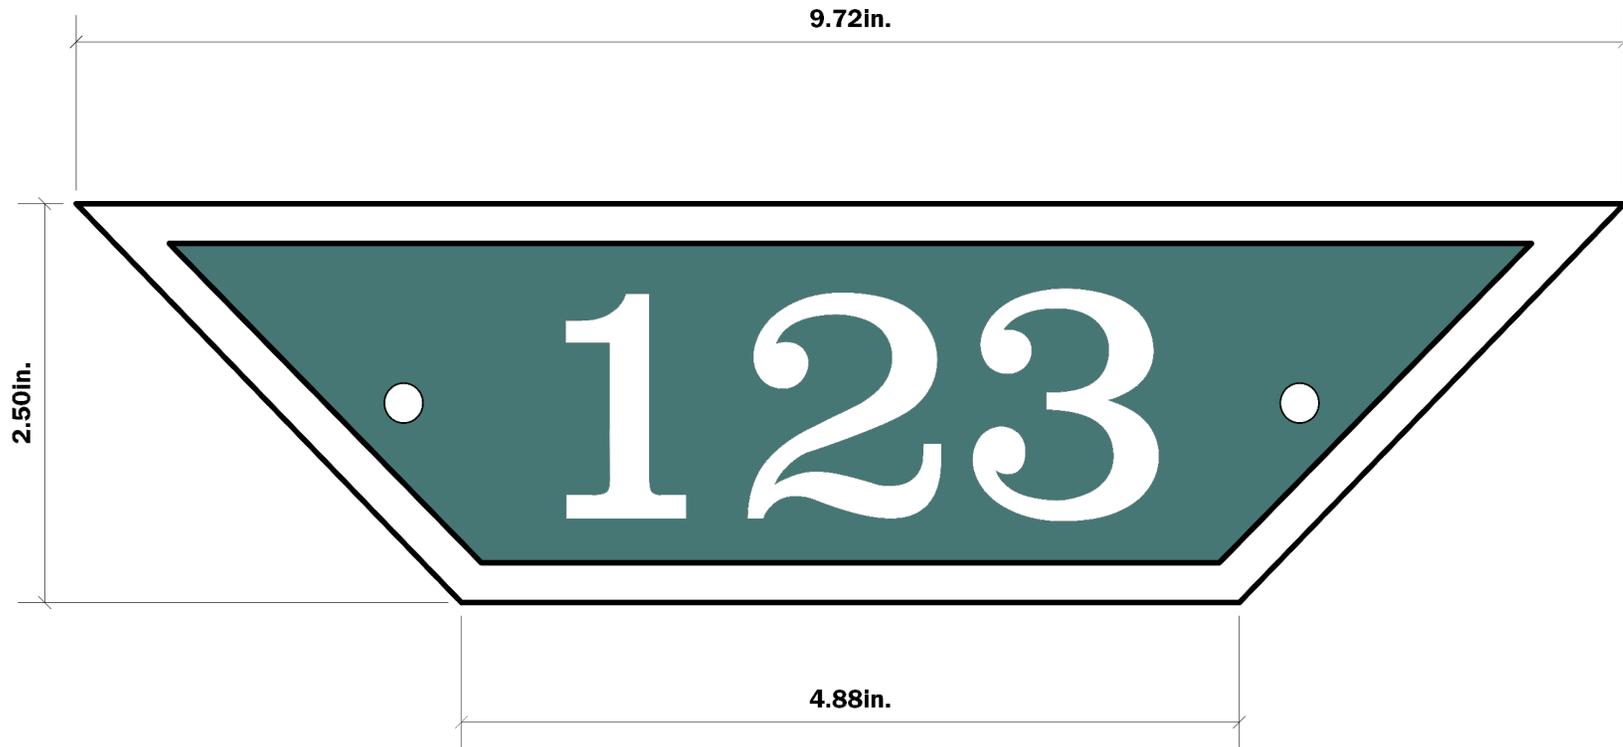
Figure C - West Park Mailbox Standard - Horizontal Cross-Member Detail and Dimensions
